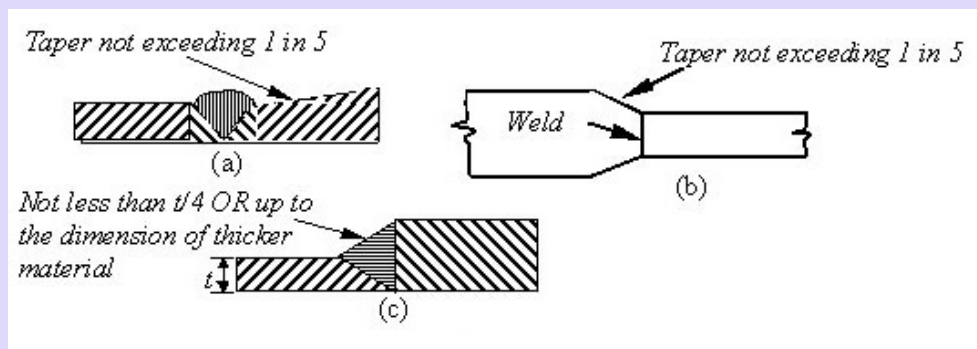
Butt welding of members with (a) & (b) unequal thickness (c) unequal width
